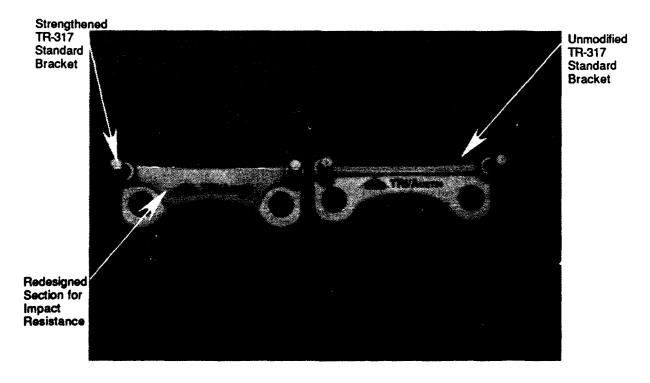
Top view of unmodified and impact modified TR-317 standard brackets
